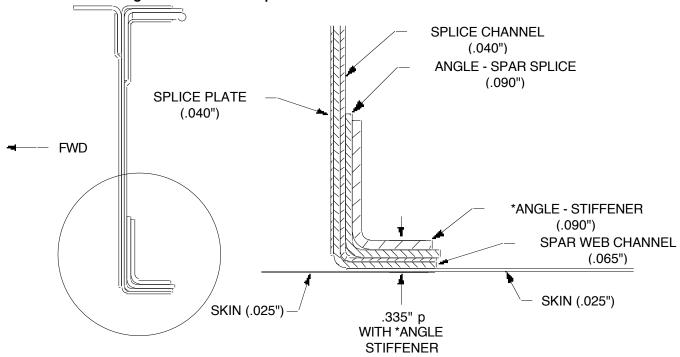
Spar Section Detail WING STATION 100 Wing with Angle Stiffener Installed
